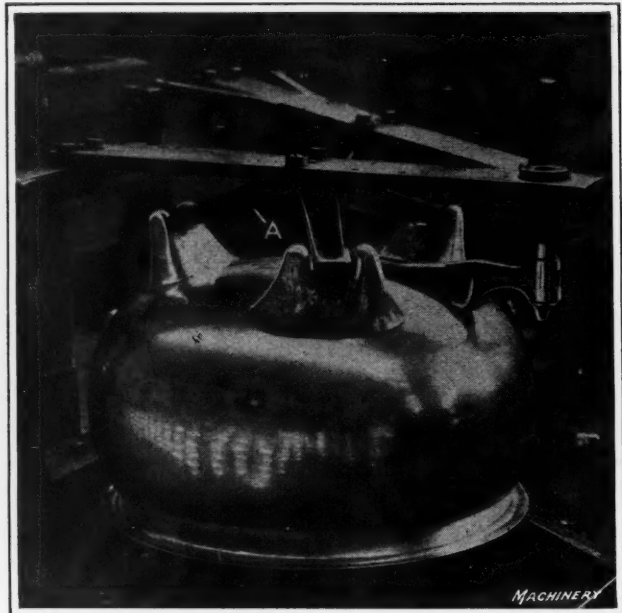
Locating Jig employed in assembling the Legs and Faucet
